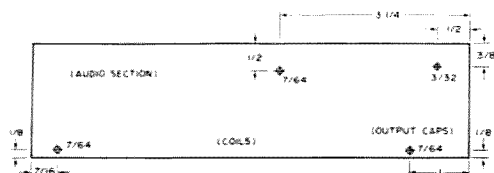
TX-432 PC board drill guide. All dimensions in inches. Foil side down; component side up.
